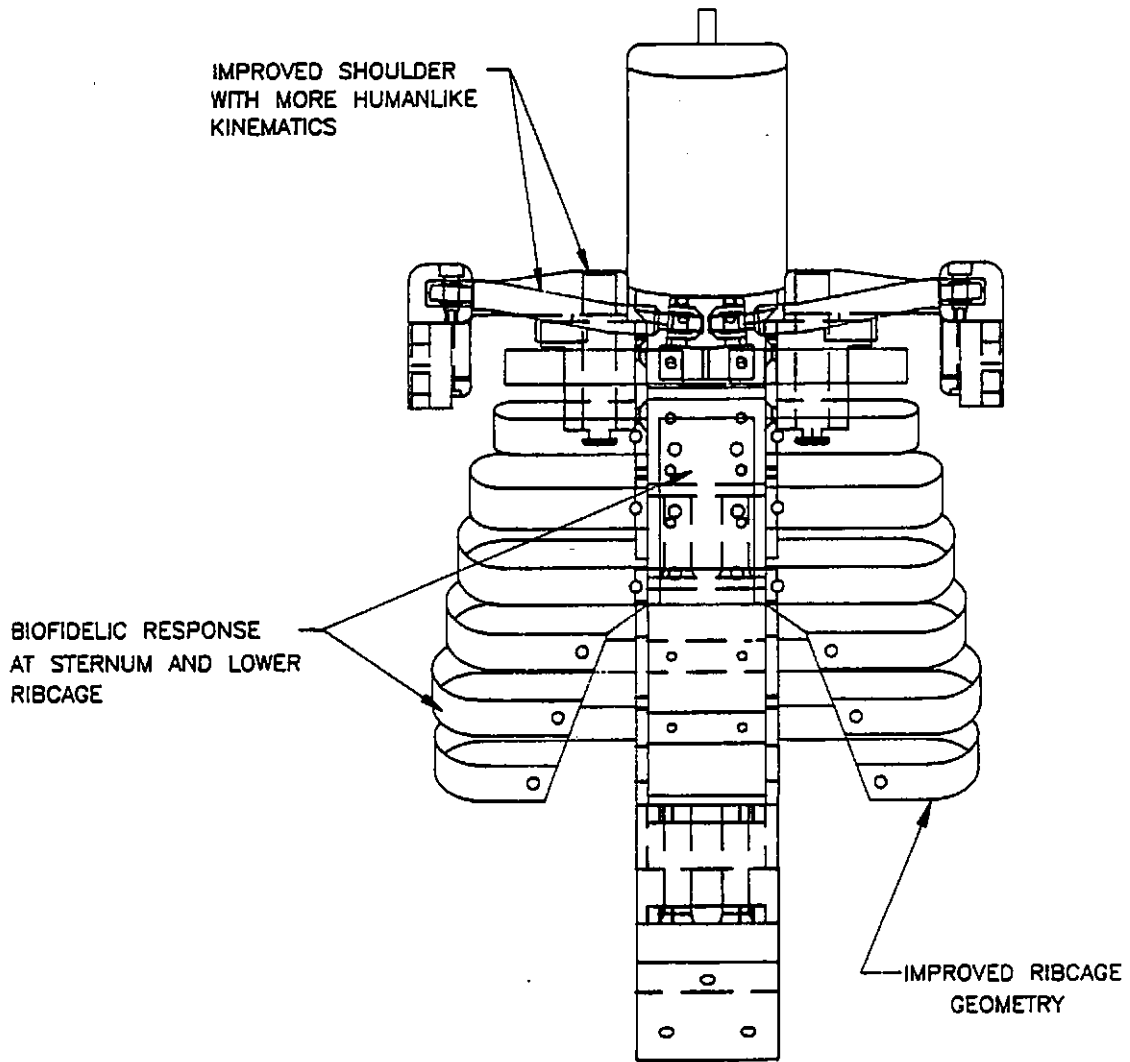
Front-view drawing of final prototype thorax assembly (abdomen not included).
